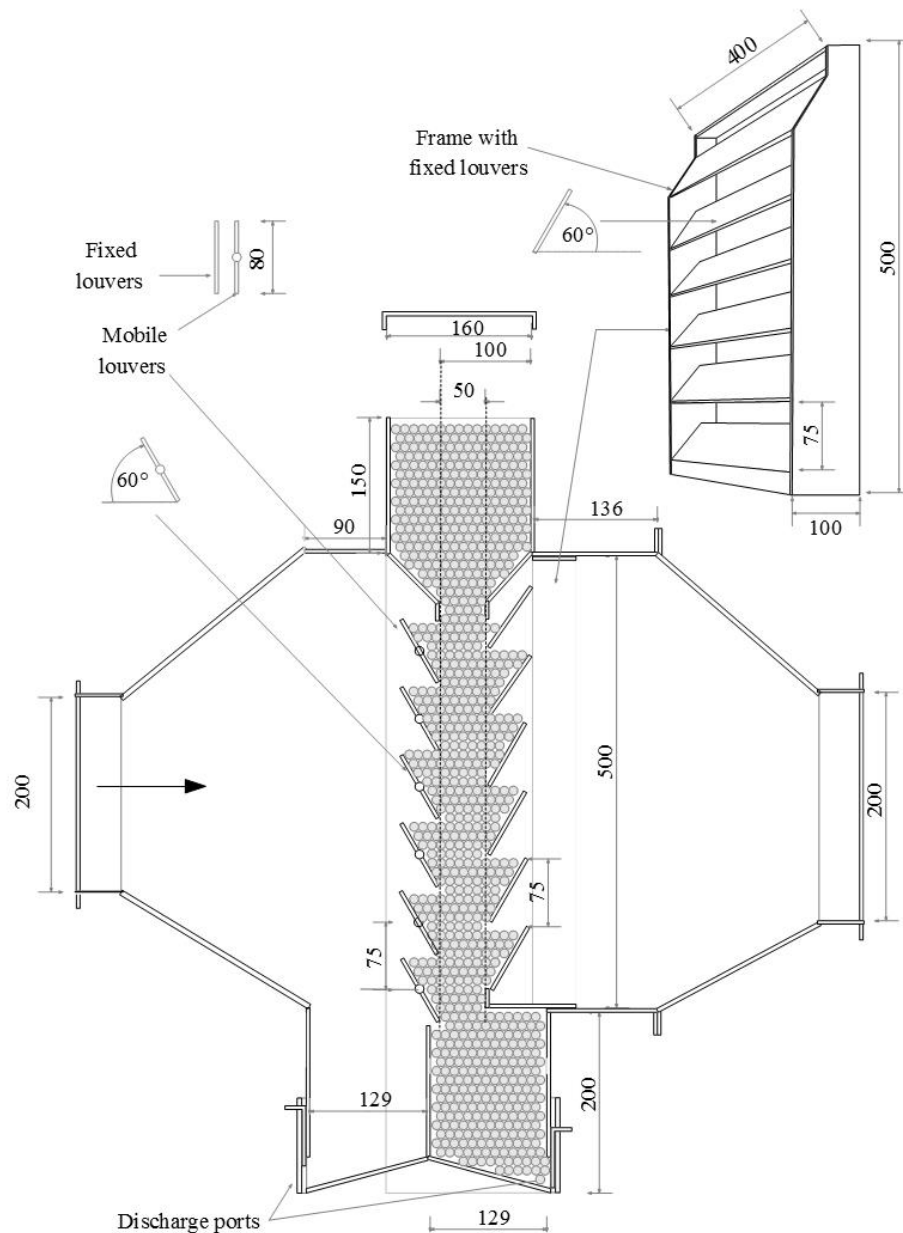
Details of the granular bed filter used in this work (dimensions in mm).
